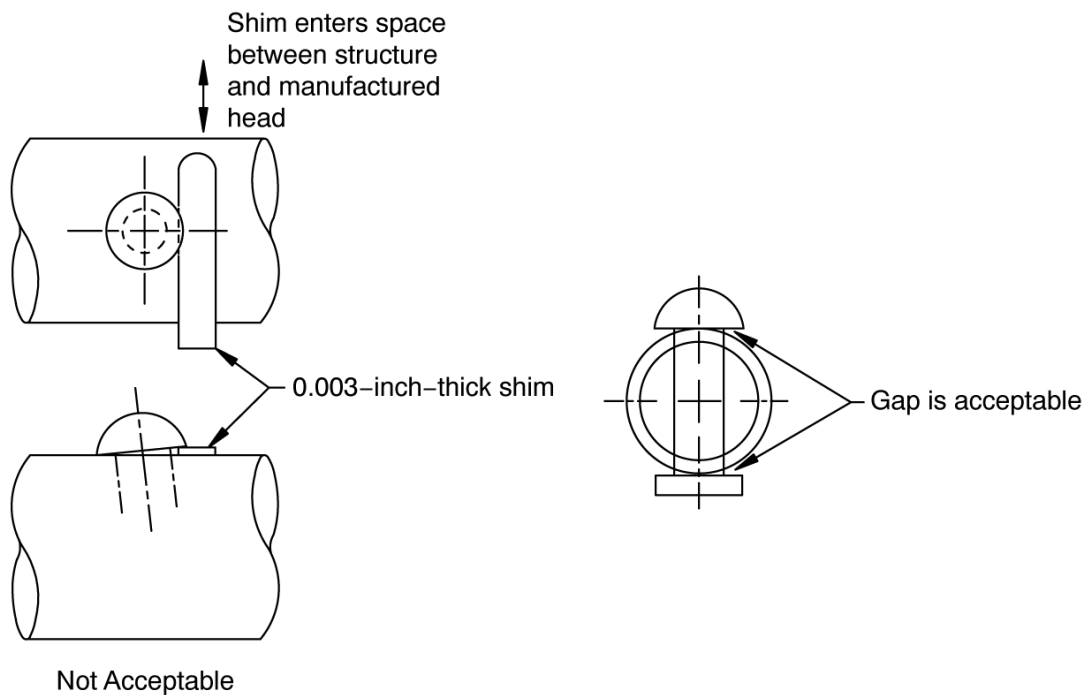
PROTRUDING HEAD GAP CHECKING METHOD, TUBE ASSEMBLIES
